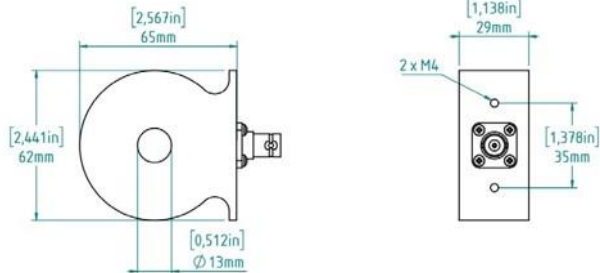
PMK LILCO®-Series 13 Mechanical Dimensions
